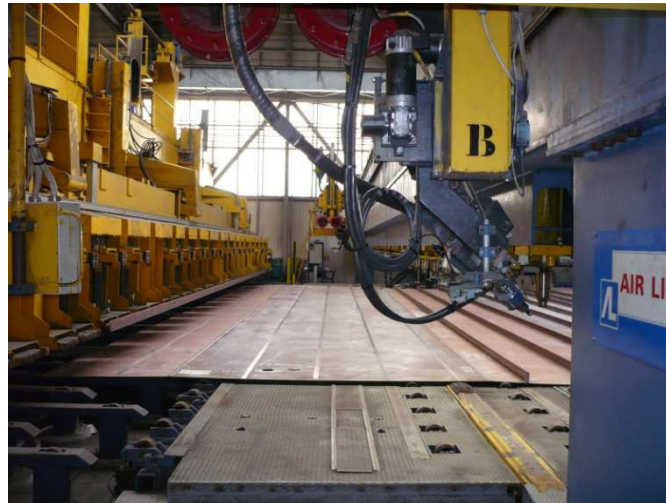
Placement of the stiffeners on the welded plates
